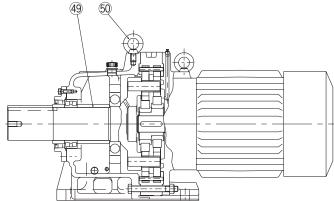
Type CHHM (Horizontal, Gearmotor), Single Reduction (Example: Frame size 6225)
